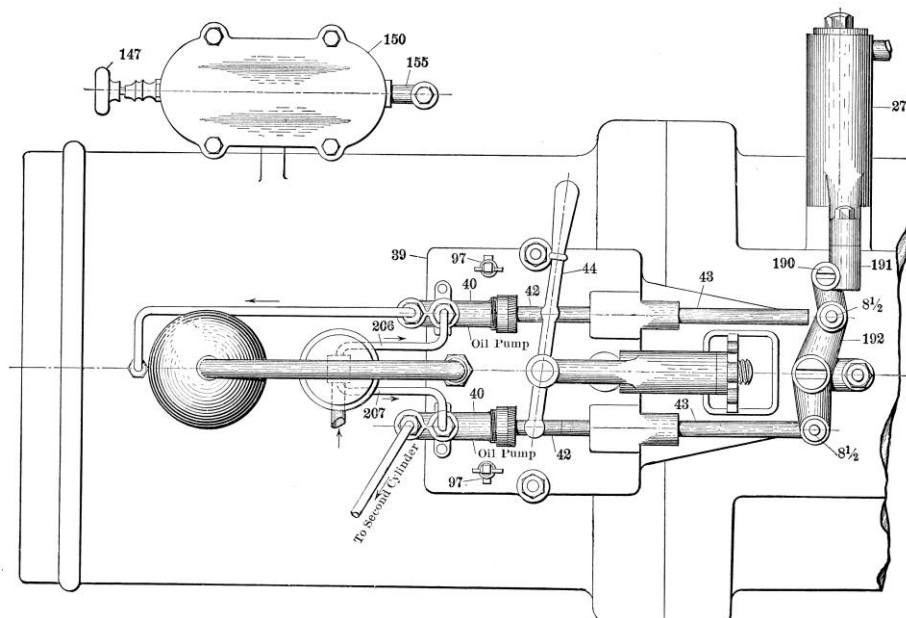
A.—Top View of Pump Mechanism and Oil Distribution of Mietz & Weiss 36-50 H. P. Horizontal Twin-cylinder Oil Engine.
